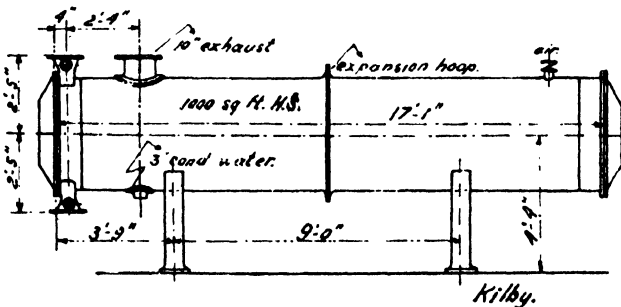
Arrangement of a Horizontal Heater of 1000 sq. ft.
